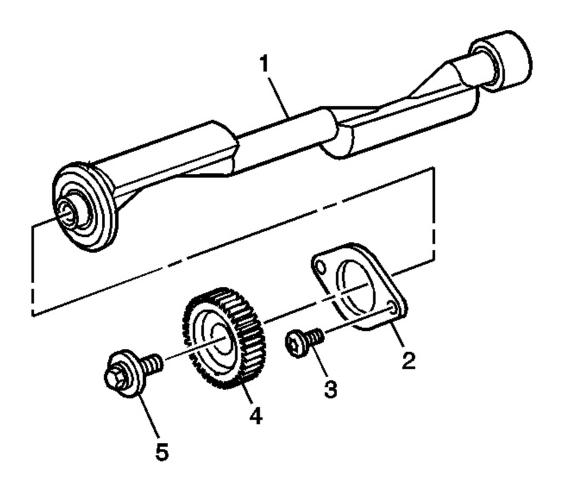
Balance Shaft Cleaning & Inspection Areas Courtesy of GENERAL MOTORS CORP.
